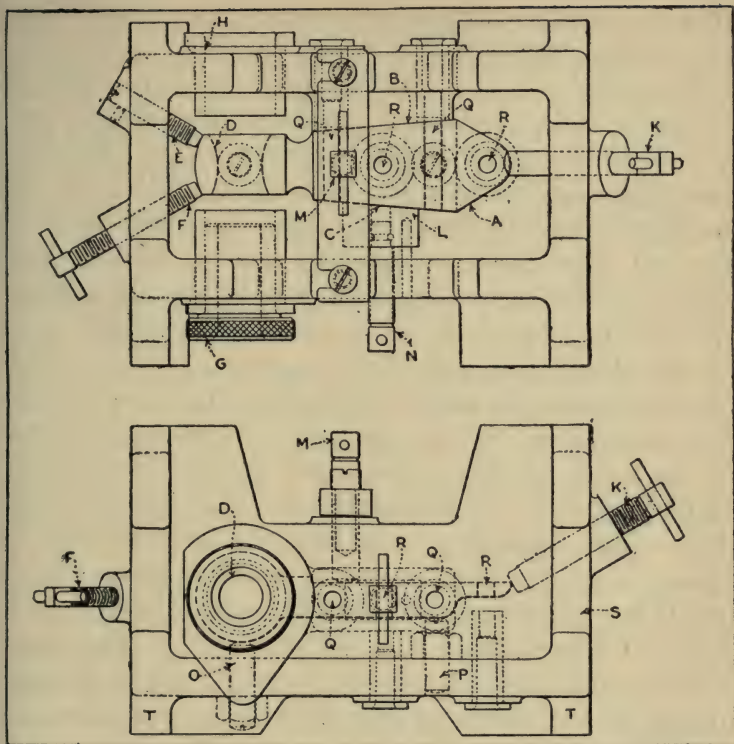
DRILL JIG FOR A RADIUS BRACKET
